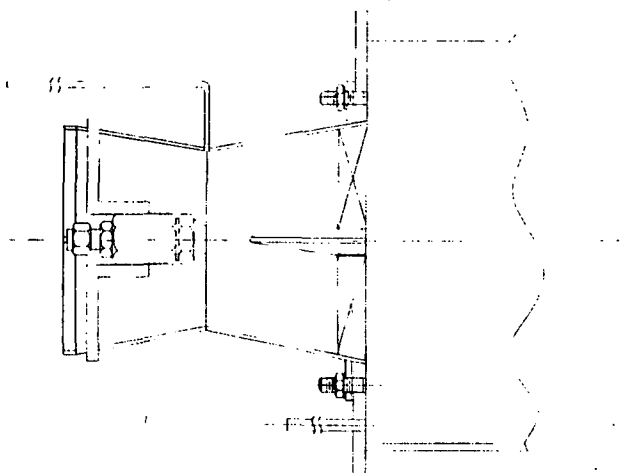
Combustor Test Configuration — Simplex Pressure Atomizing Nozzle
